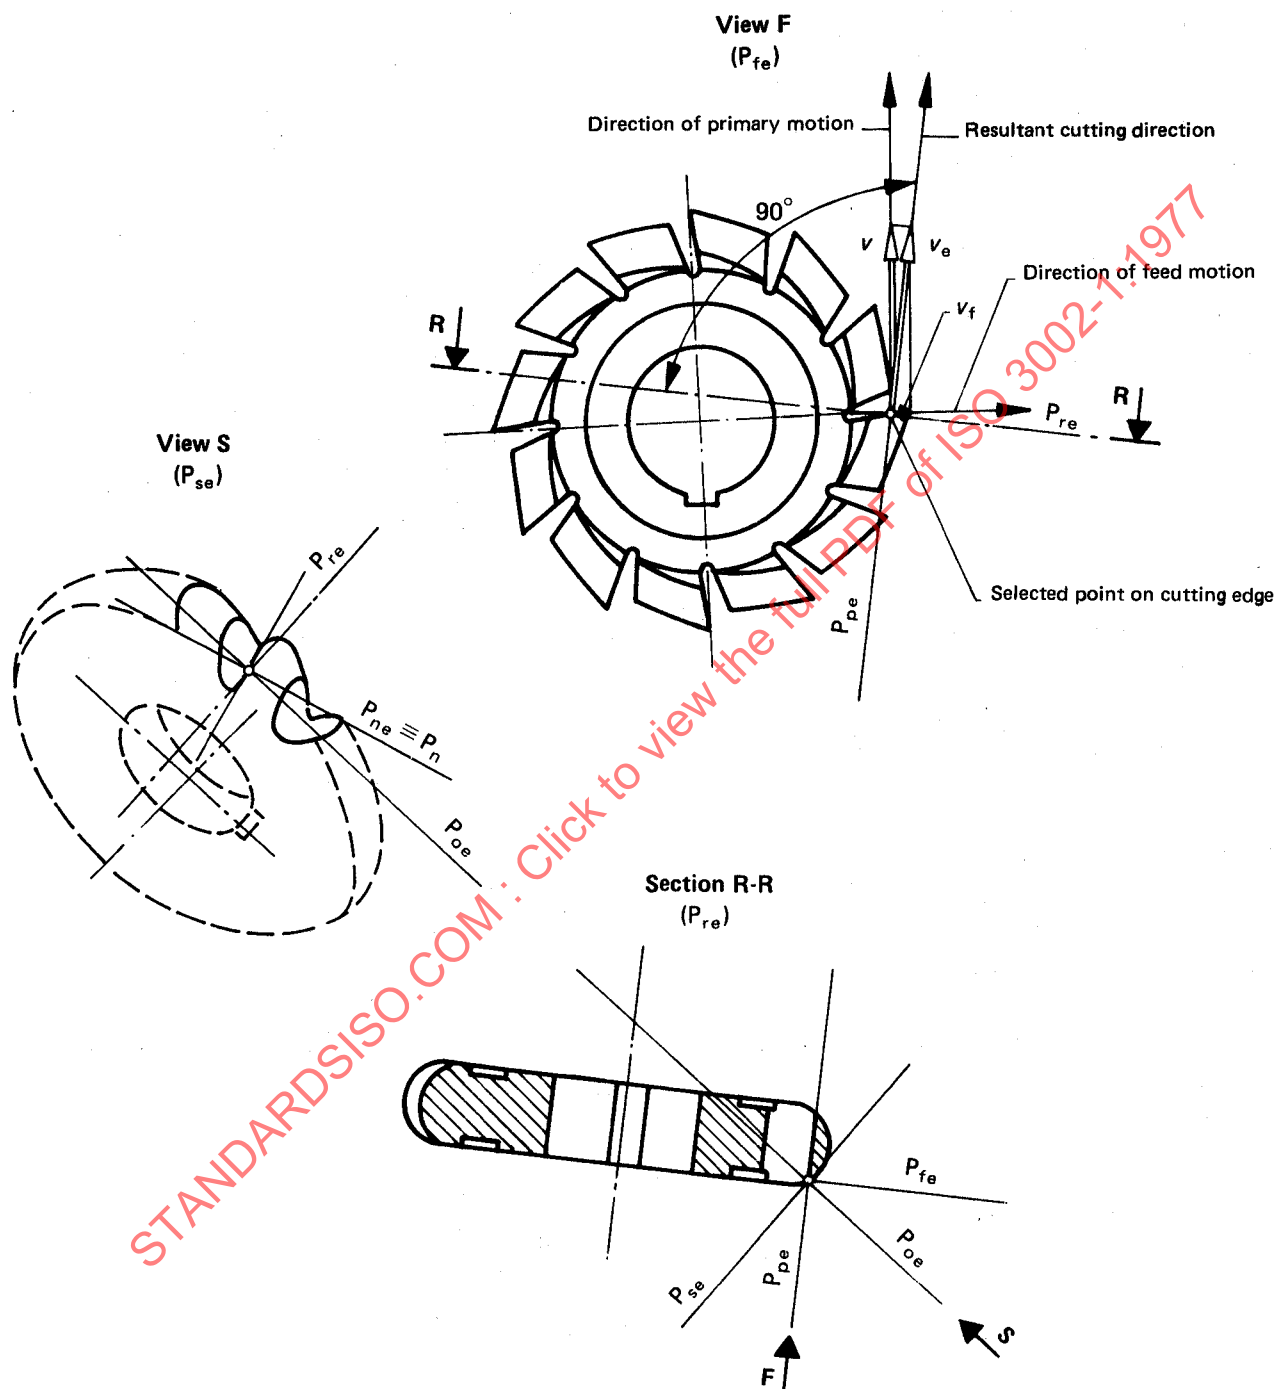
Planes in the tool-in-use system — Convex milling cutter
